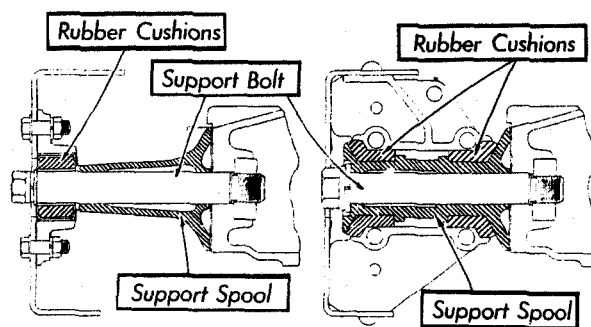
The 355 engine supports at the flywheel housing are different than on the 345.
